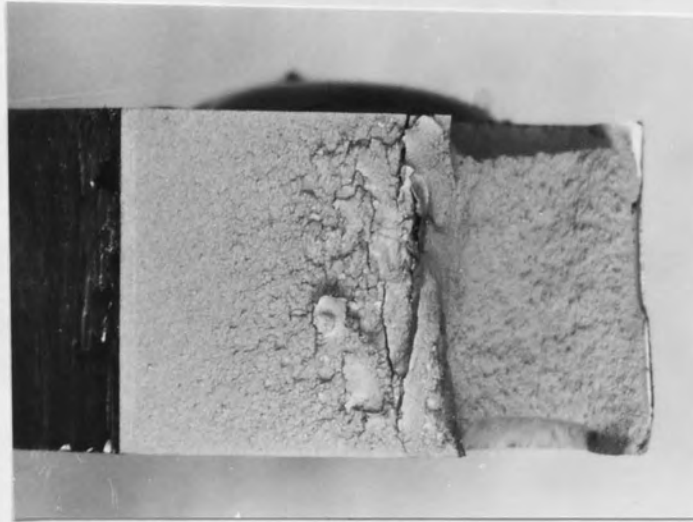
Typical fatigue fracture surface for Saffil-reinforced 6061-T6 specimens.
